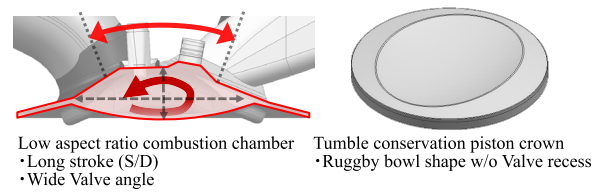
Combustion chamber and piston crown design for tumble conservation
